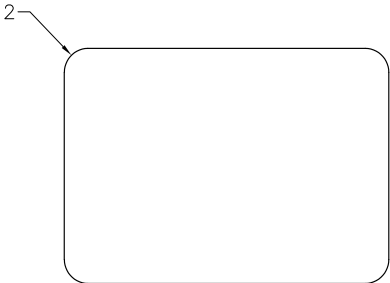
Rectangle filleted using the same radius with the Equal button chosen
